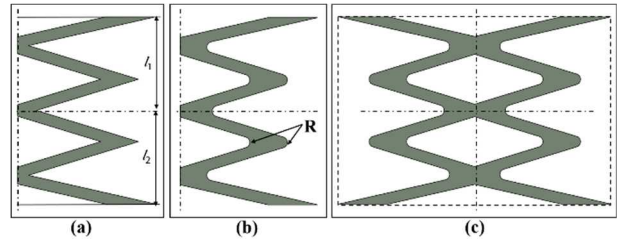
Square type spring structure (a) A two-layered saw tooth shape is used (b) Fillet is to enhance the mechanical strength (c) Single spring
